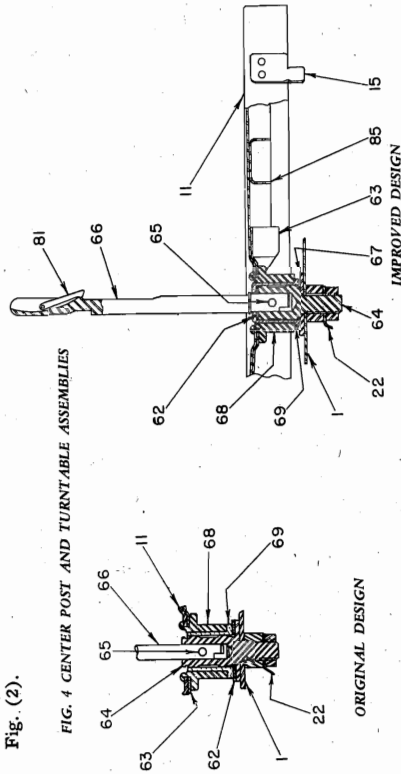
CENTER POST AND TURNABLE ASSEMBLIES
